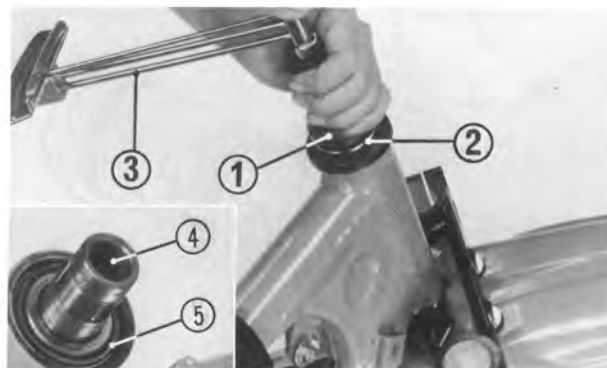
(1) Steering stem socket wrench (2) Top thread nut (3) Torque wrench (4) Steering stem (5) Steering stem bearing
